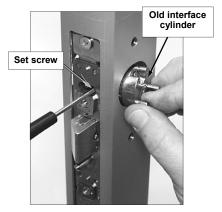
Loosen set screw before removing the old interface cylinder (if present)
